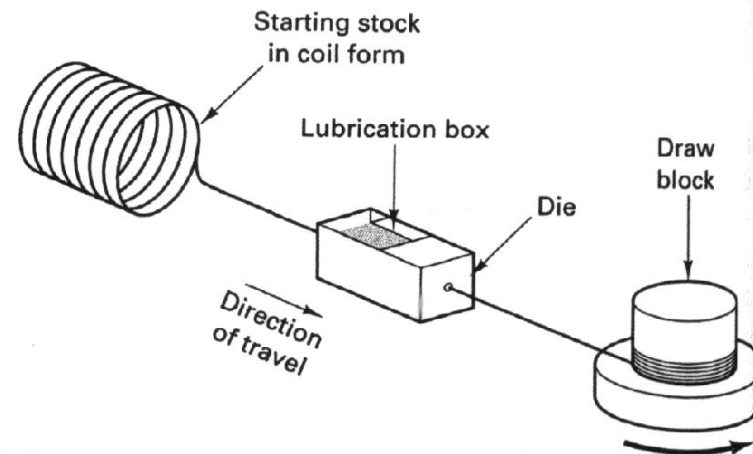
Schematic of wire drawing with a rotating draw block. The rotating motor on the draw block provides a continuous pull on the incoming wire.
